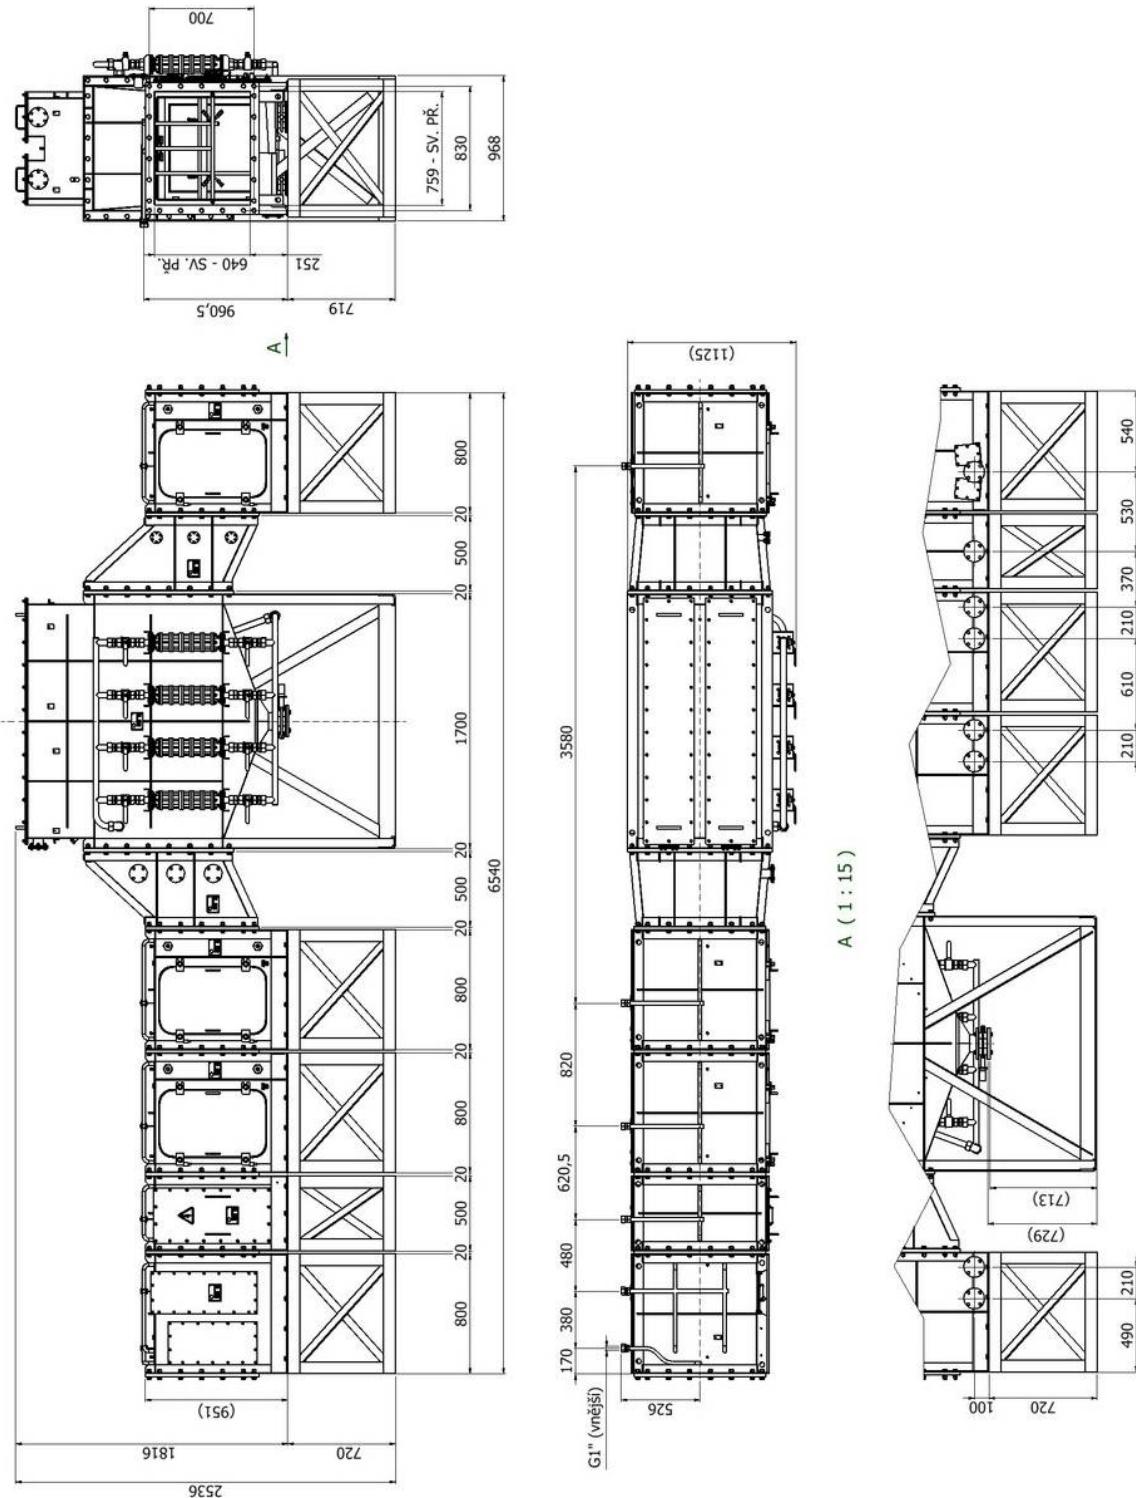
Main dimensions of the filter unit 4, solid right-hand model
